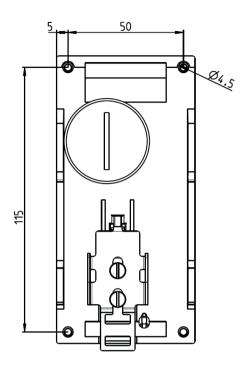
Small design dimension drawing (IE Switch X-306)
